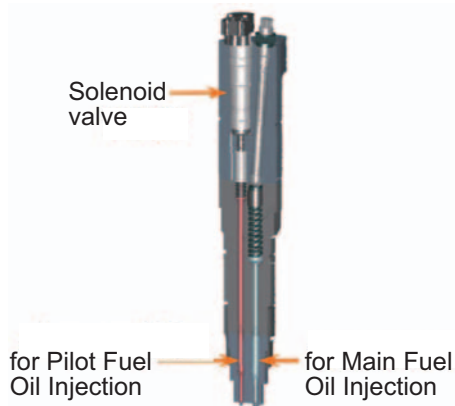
Example of fuel injection valve for Dual Fuel engine<sup>(3)</sup>
